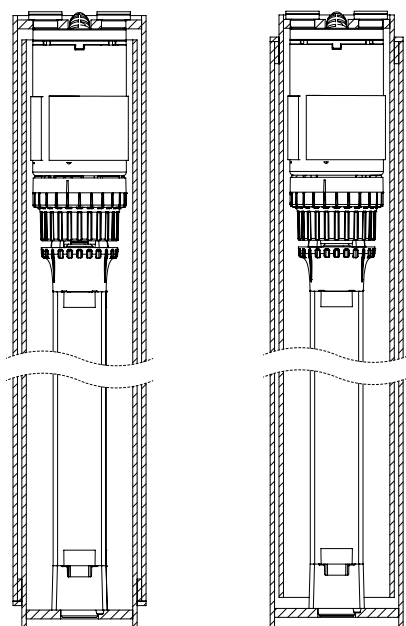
“Thick Tube Up” (left) and “Thick Tube Down” (right) in their retracted positions
